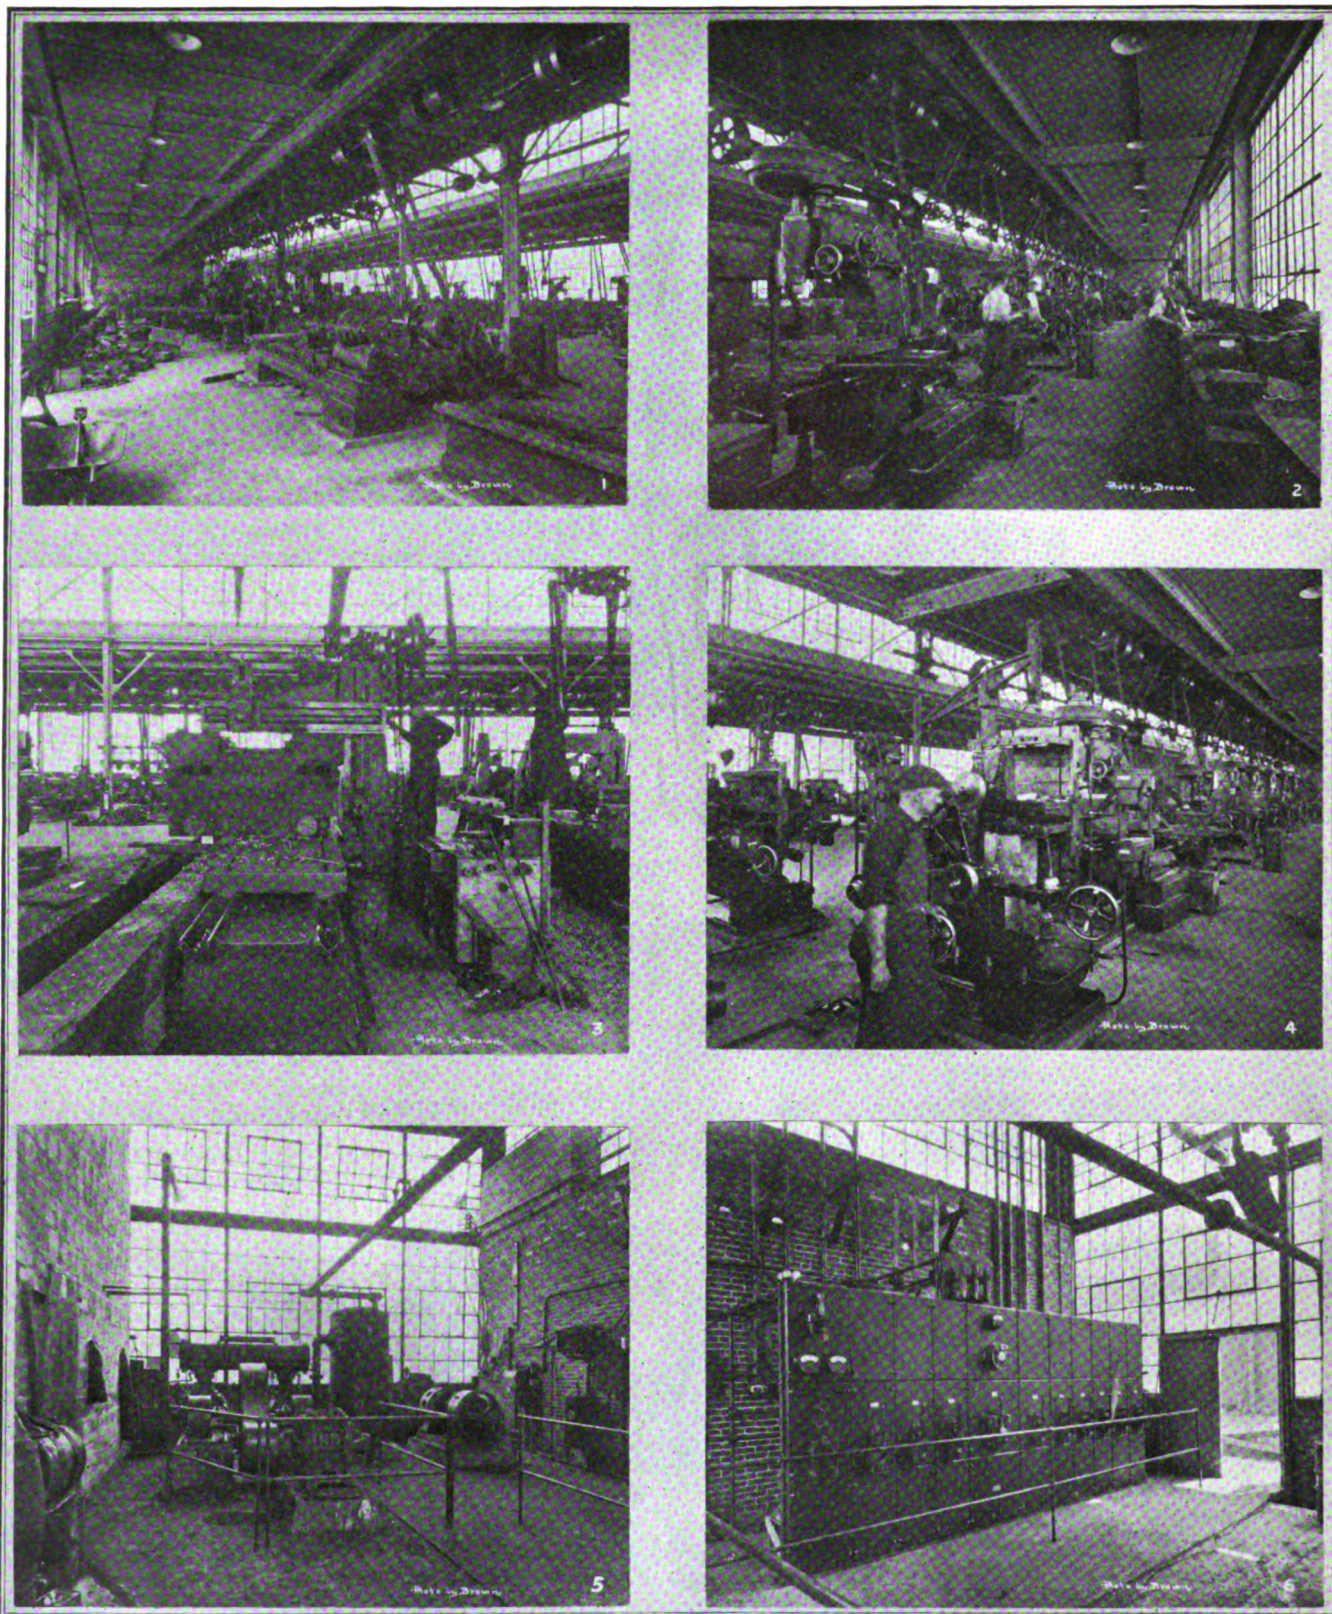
View of repair department in the machine shop, Pittsburgh Knife & Forge Company, showing lathes and planers used in making repairs on all shop equipment.
